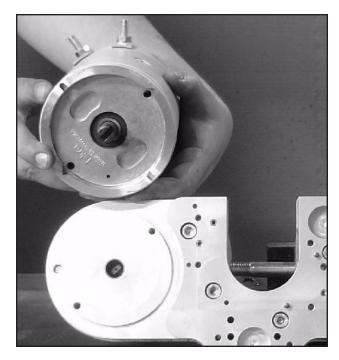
Carefully remove the motor as one piece. While holding motor together use the motor mounting bolts along with a 1/4 -20 nut to prevent the motor from pulling apart.
